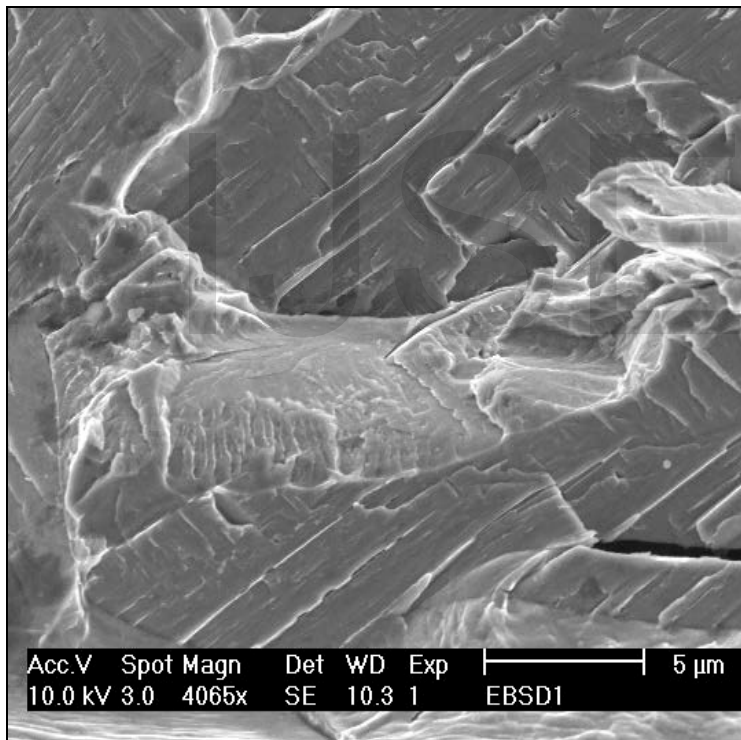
Fracture surface of specimen aged for 100h at 475°C .
